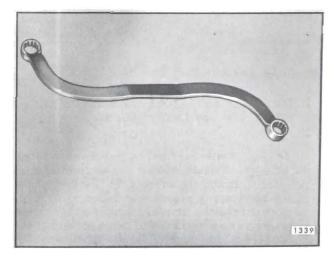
Front Door Hinge Tool J-21550 -''A & F'' Body
